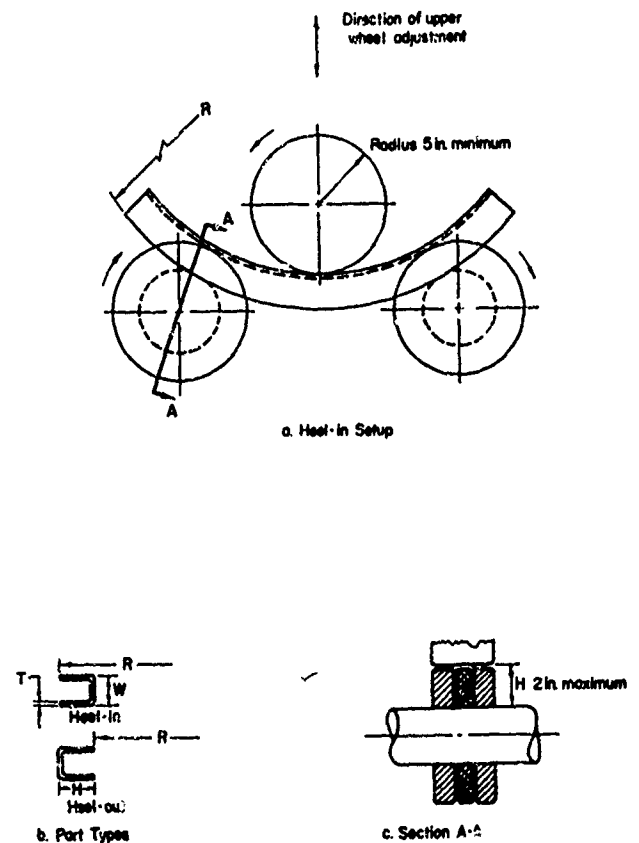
PART TYPES AND SETUP FOR ROLL BENDING<sup>(1)</sup>
